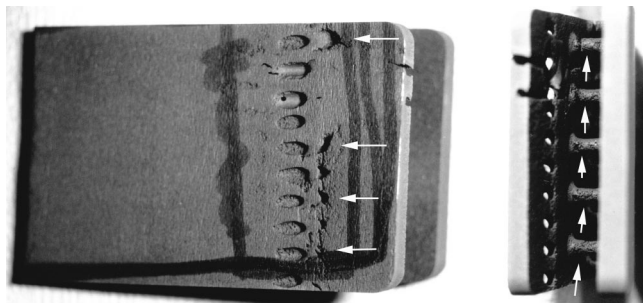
A photograph illustrating irreversible stripping damage caused to a pin fin array
